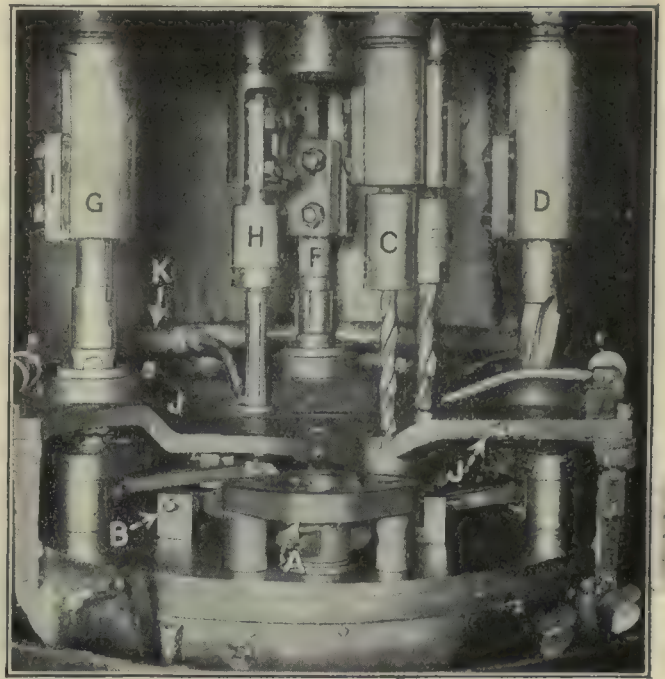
SPECIAL DRILLING MACHINE FOR BOTH ENDS OF ROD
